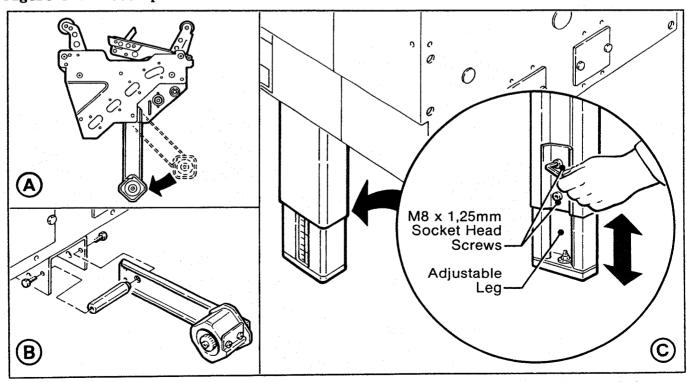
Conveyor Bed Height Adjustment and Lower Tape Drum Bracket Position
